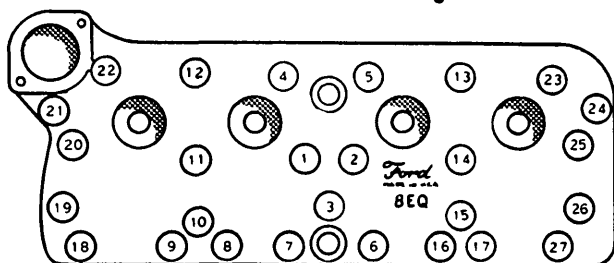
Cylinder head tightening sequence, 1949-51 Lincoln
